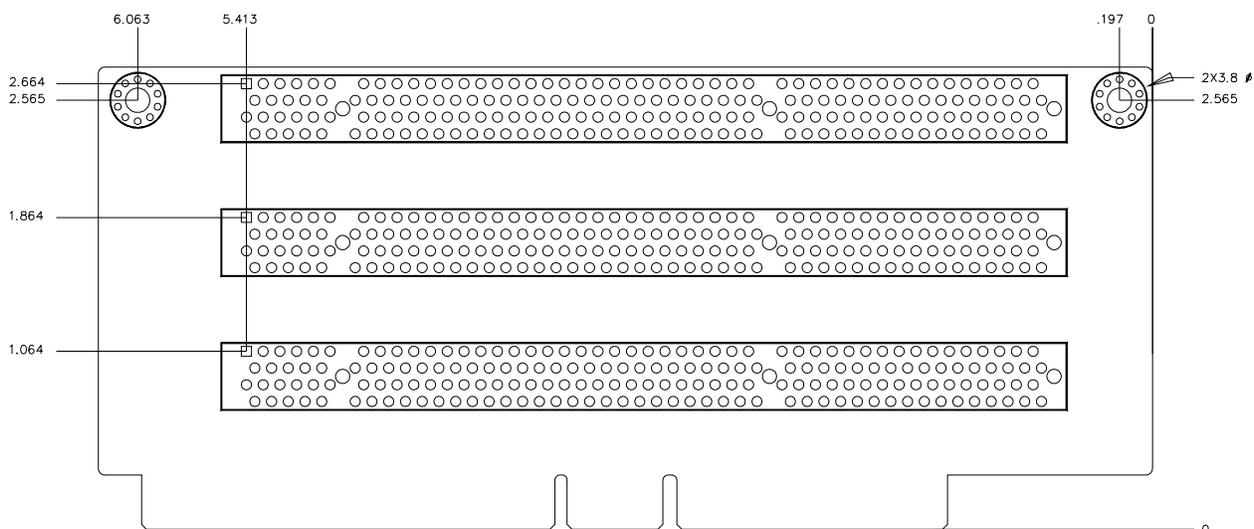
3-Slot PCI Riser Mechanical Drawing
